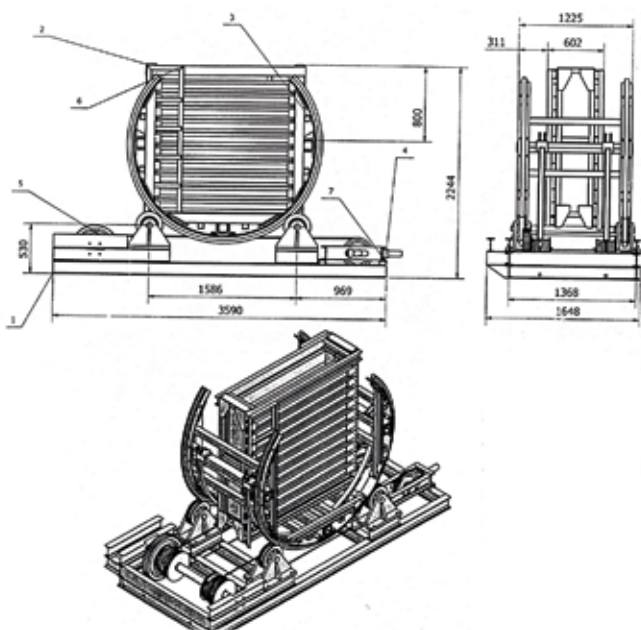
Model frame with 1- base frame, 2- rotational frame, 3 - drum frame, 4 - pull leg, 5 - drive part, 6 - ladder part, 7 - cable part
